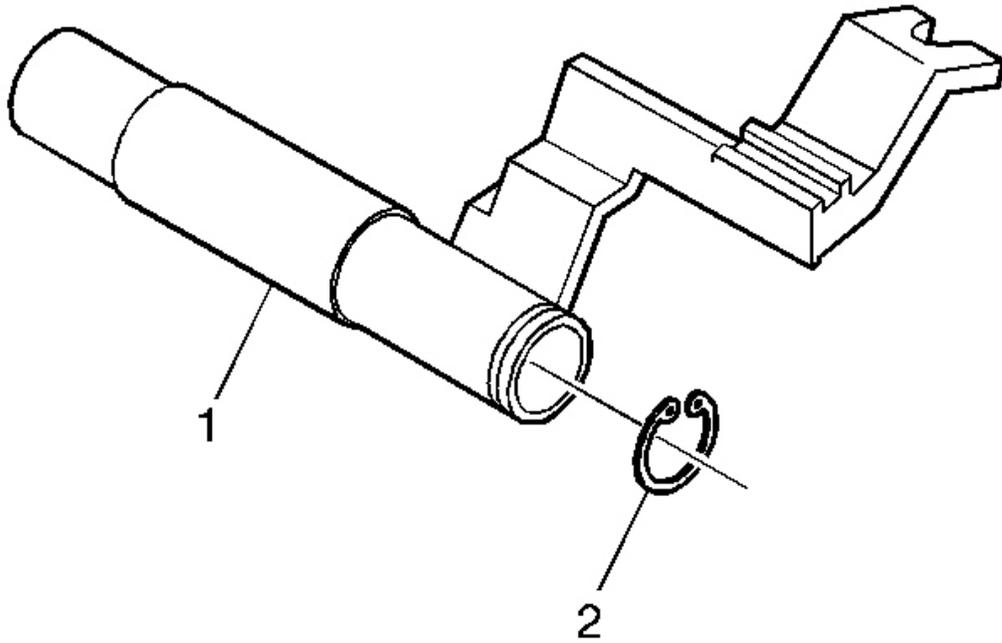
Locating Retainer Ring On 5th/6th Shift Lever
